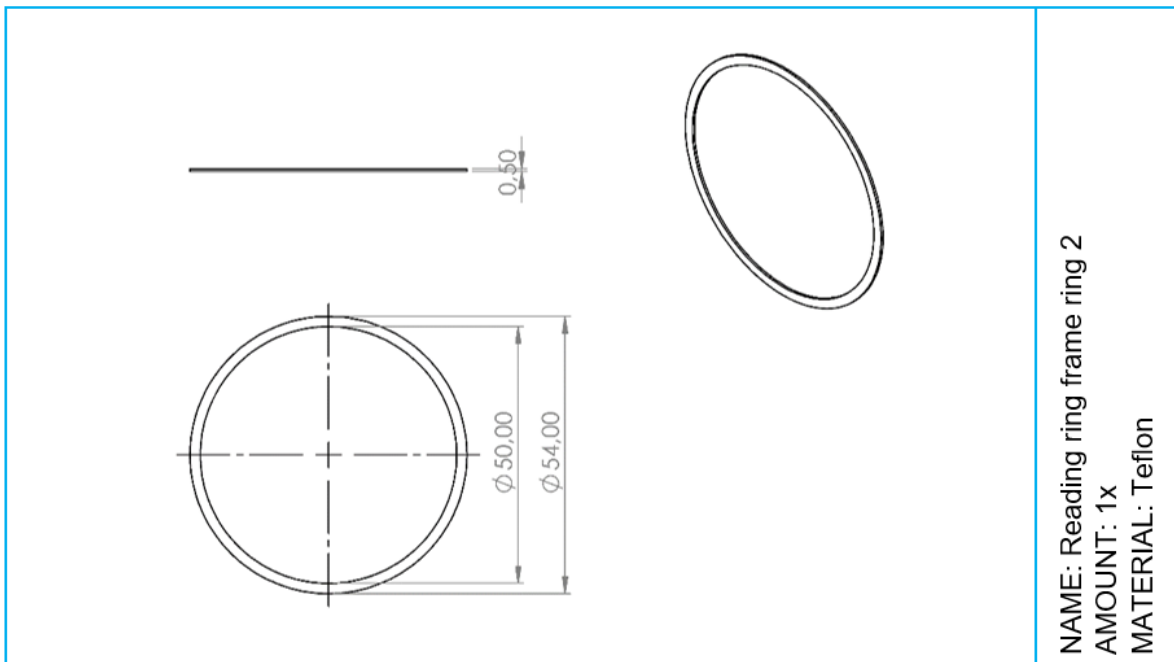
Construction drawings of the reading ring frame outside ring- Machined prototype
